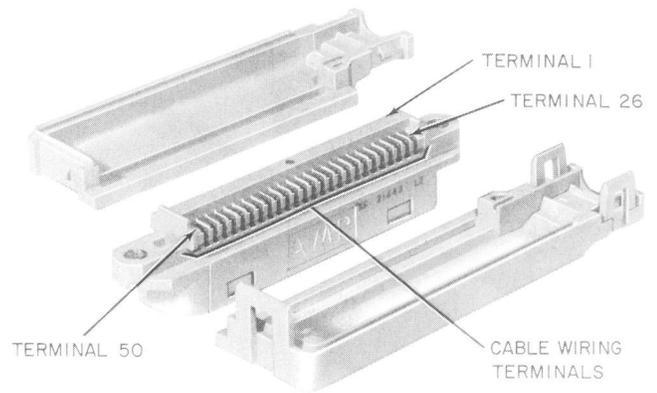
KS-21443, L1 or L2 Plug, Hood Removed
